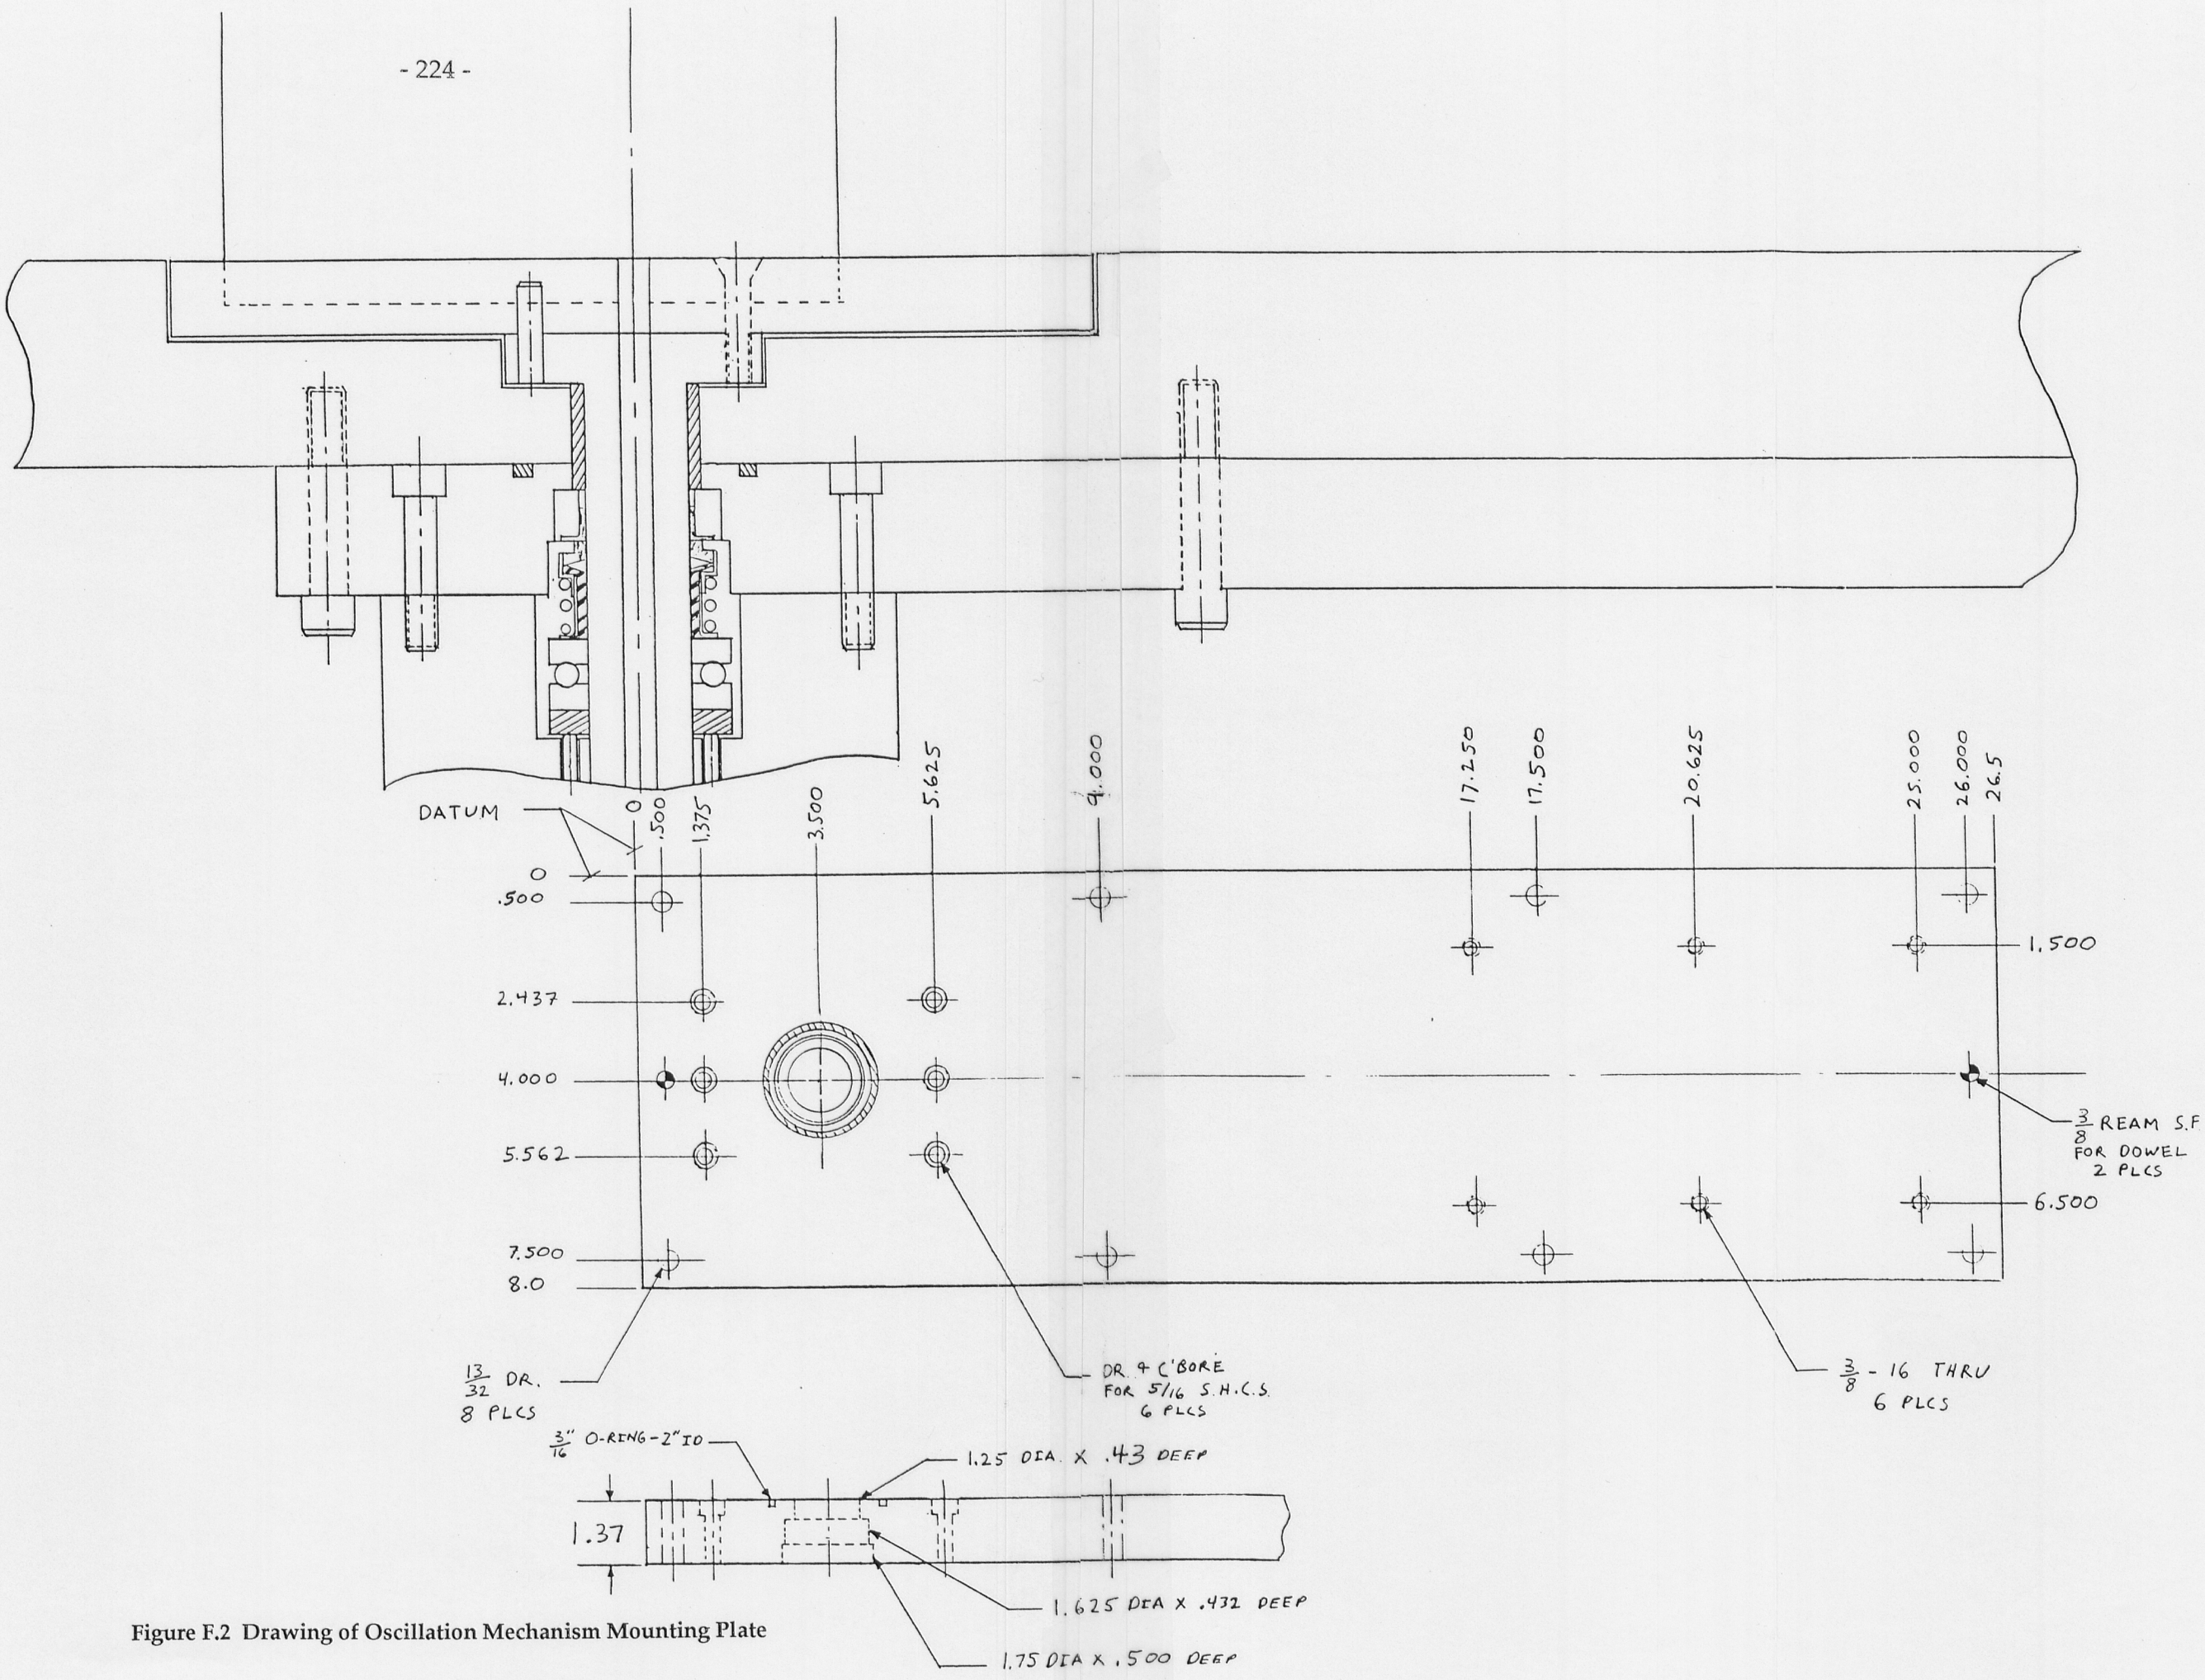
Drawing of Oscillation Mechanism Mounting Plate
